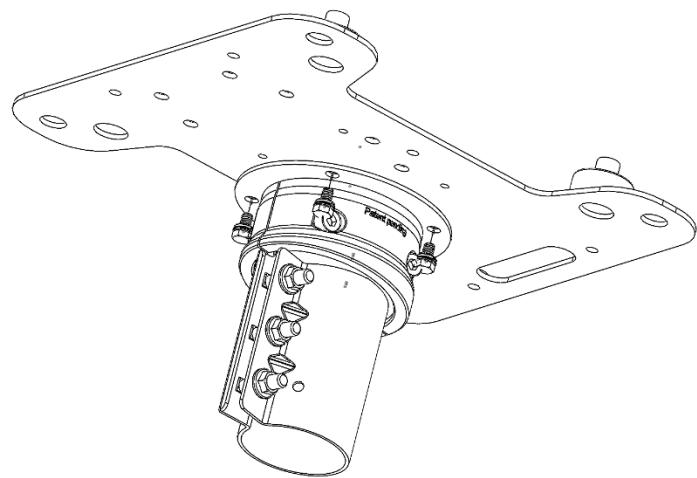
Attach Adjustable Mount Adapter to Maritime Mount Adapter Plate
